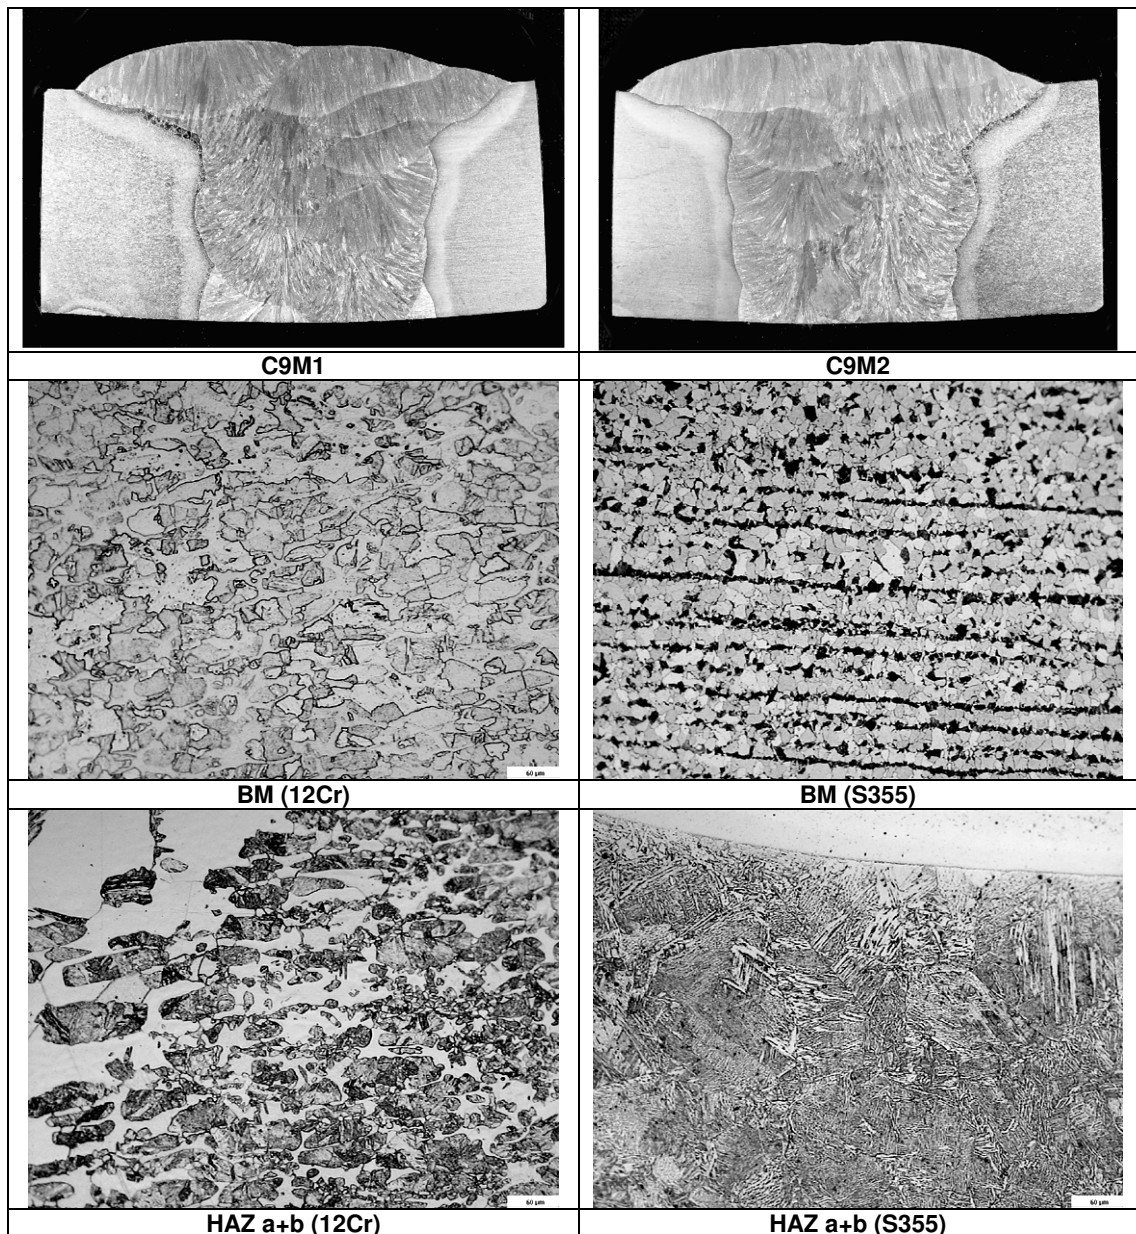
Macro and microphotographs of 20 mm thick SAW weld with 309 filler metal (C9).
